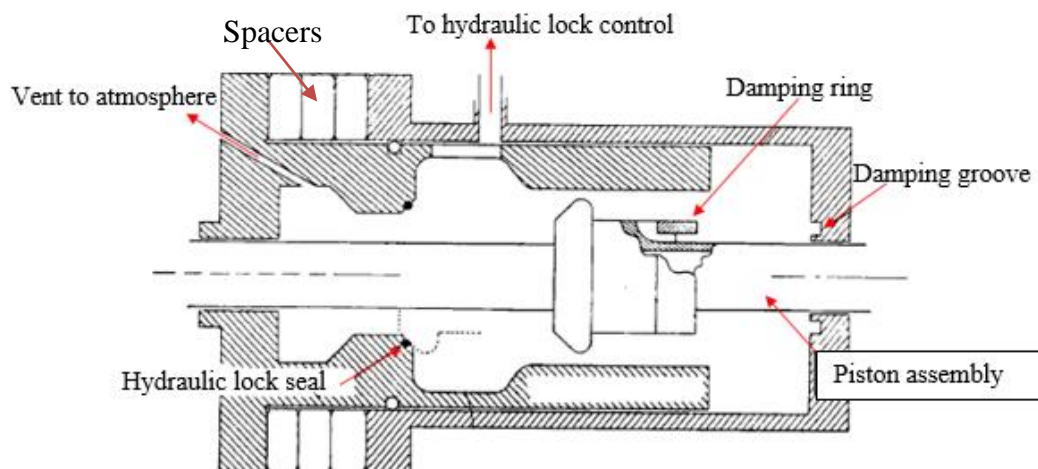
Sectional view sketch of Leeds RCM showing piston damping mechanism.
